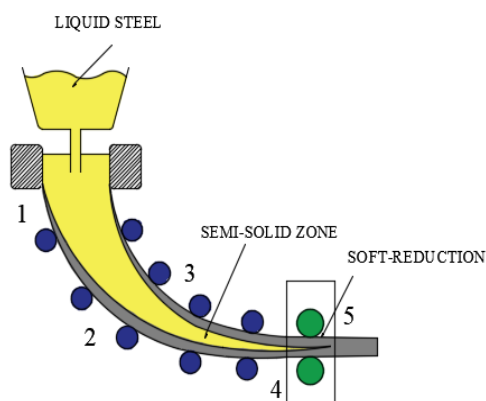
Diagram of the continuous casting process with indicated critical process stages (1-5) where either internal or frontal cracks can be initiated
